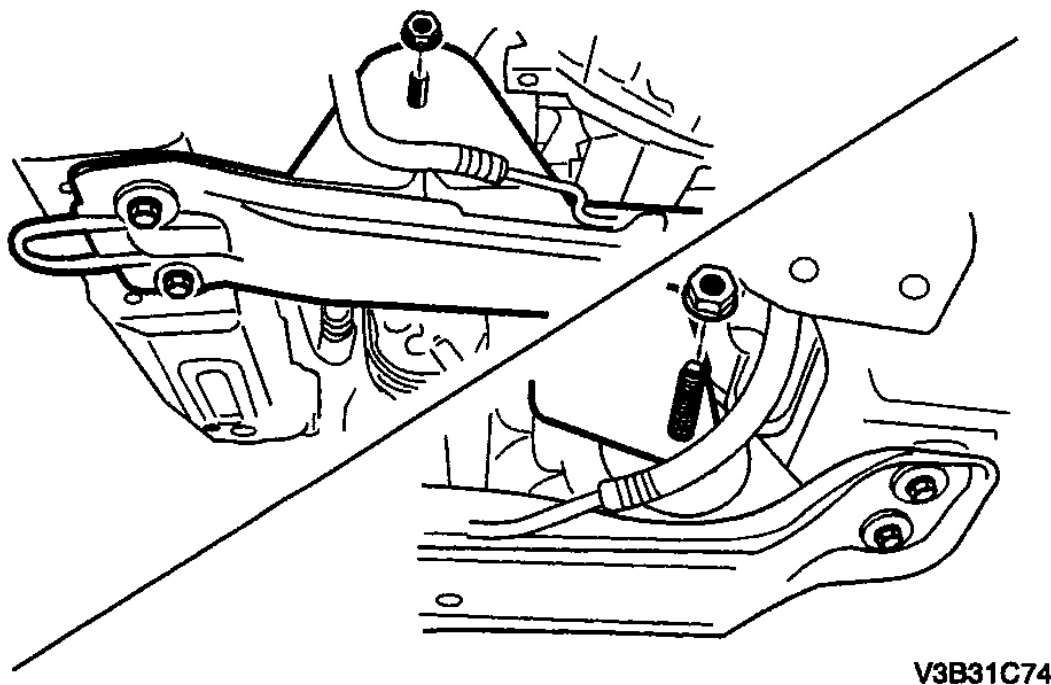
Removing Front And Rear Engine Mount Bracket-To-Damper Bush Bolt/Nut
